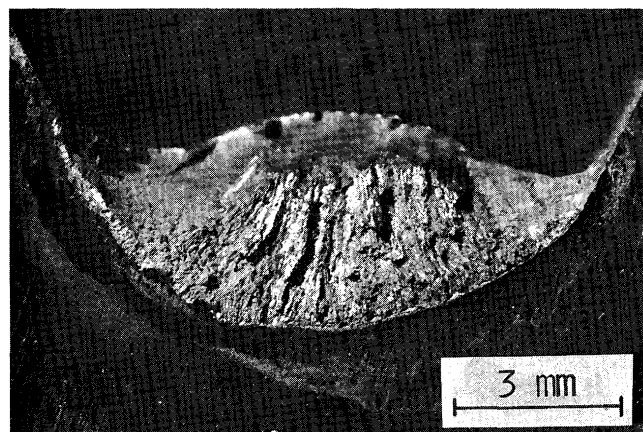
shows the change in fractured surface with an increase of applied stress in HT-80 with the LB-TRC test in which SMA welding is done utilizing 170A, 25V, and 150mm/min at room temperature. Chemical composition and mechanical properties of HT-80 steel are shown in Tables 1 and 2 of 3.1. Macroscopic fractured surface in 30kg/mm² applied stress in Photo. 2(a) has mainly a directional and brilliant appearance containing shear lip mode in a limited region along the bead surface. In photo. 2(b) of 53kg/mm² applied stress, a directional region and a fibrous region spread from the root edge parallel to the groove face as a fan-like shape, and shear lip region is larger than that in Photo. 2(a). The directional and brilliant region occupied in the majority and the fibrous region in part in a fan-like shape region. Fractured surface of 70kg/mm² in Photo. 2(c) has mainly a fibrous region and a shear lip in the bead surface region. The directional region is microscopically composed of intergranular fracture mode along columnar crystals and quasi-cleavage fracture mode, which correspond nearly to IG_C region in the previous report²⁾. The fibrous region is composed of dimple fracture mode and the shear lip region is composed of shear dimple fracture mode, which correspond to D region in the previous report²⁾.
